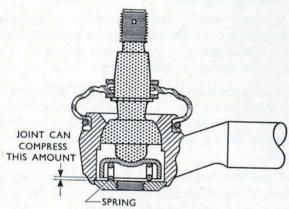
Sectioned view of steering joint showing the spring-loaded self-adjusting details
